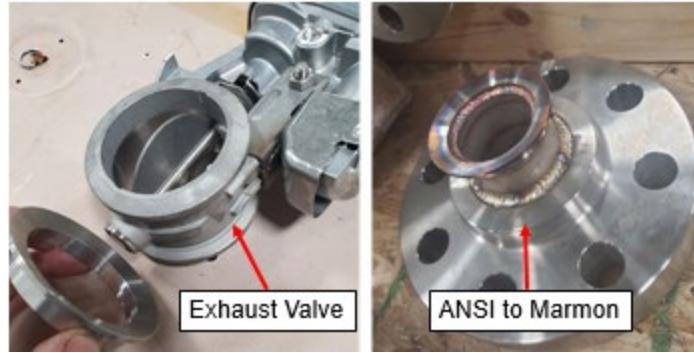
Exhaust Back Pressure Valve and ANSI to Marmon Flange
